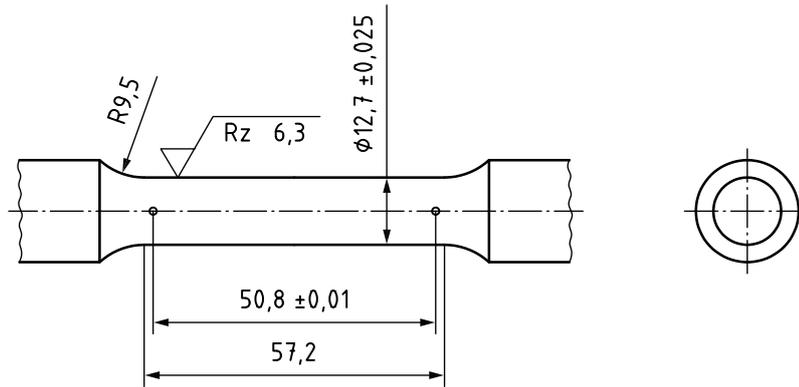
Tensile test piece with a gauge length  $L_0 = 4 \times d$
